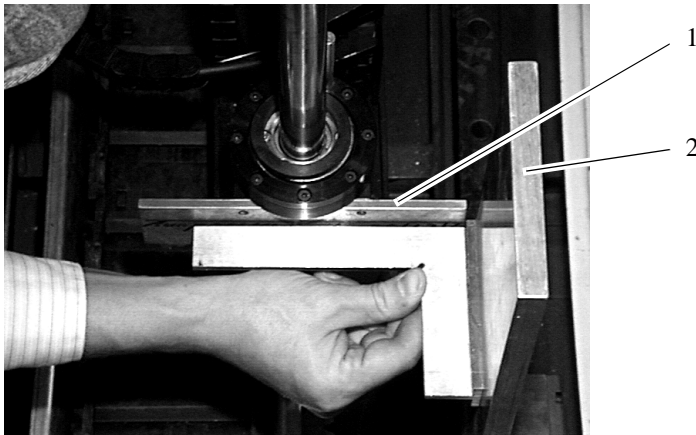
Measurement of the Zero-Point of the Robot Rolling-Axis
